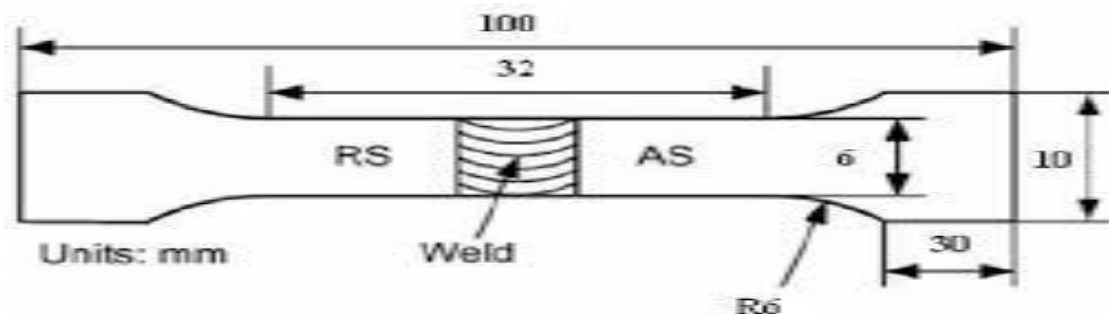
TEST SAMPLES FOR TENSILE TESTING
